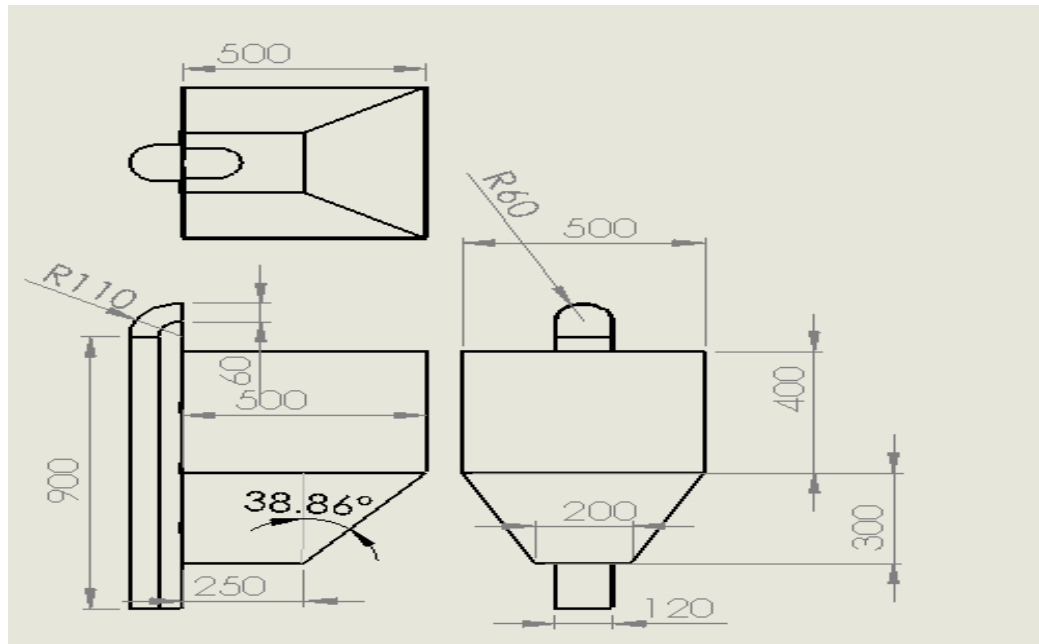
Isometric view seed hopper (all dimensions are in mm)
